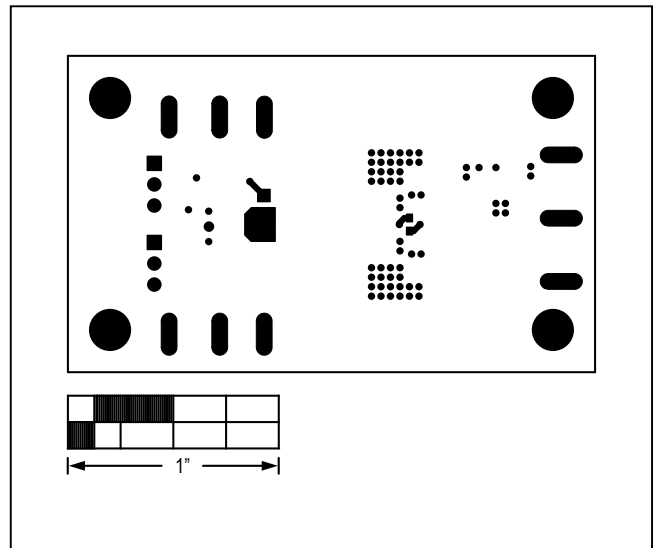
MAX258 EV Kit PCB Layout—Solder Side
